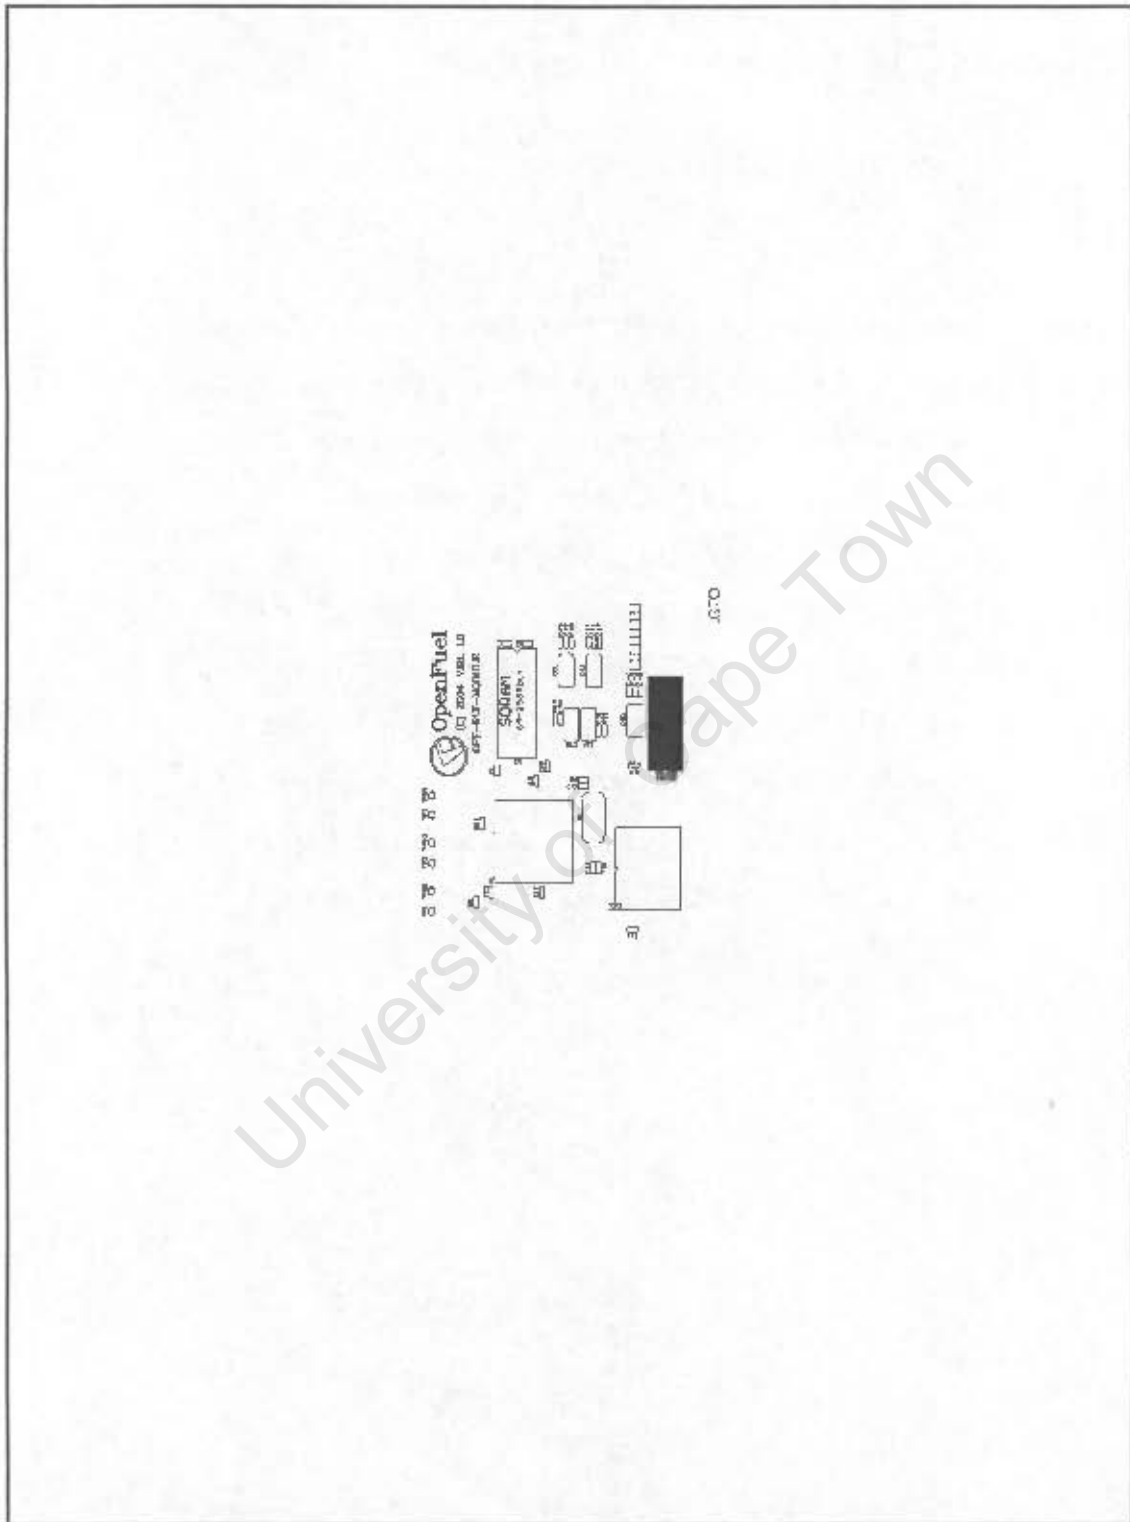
RUI Module PCB Layout - Top Overlay Layer
